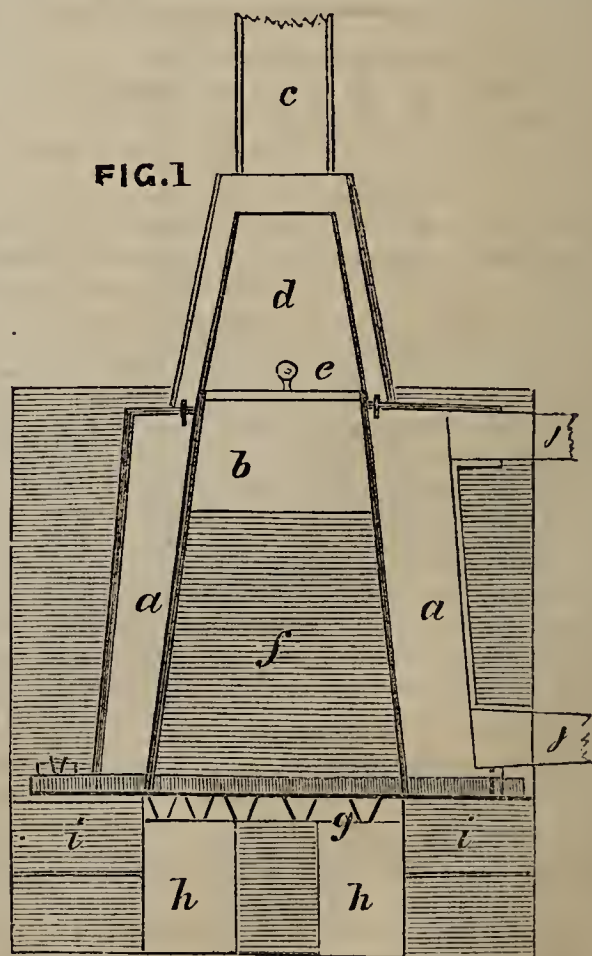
is a general elevation of the apparatus in section, scale an inch and a half to a foot; a boiler, b firebox, c chimney,
